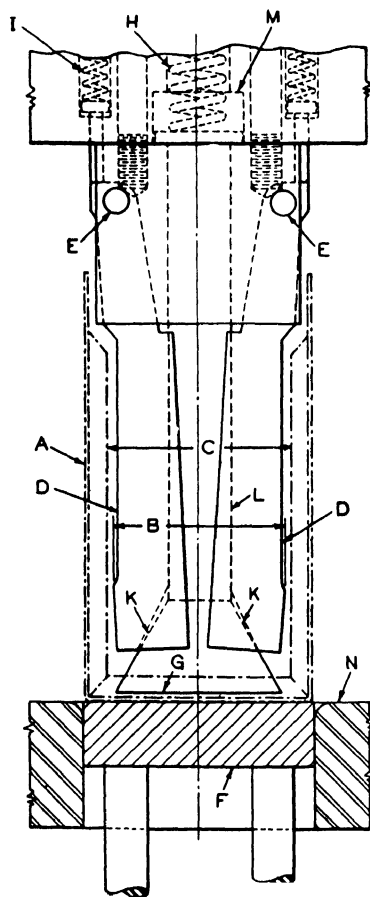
Die shown in the preceding sketch with its punch collapsed to permit removal of the completed U-shaped frame *A*.
